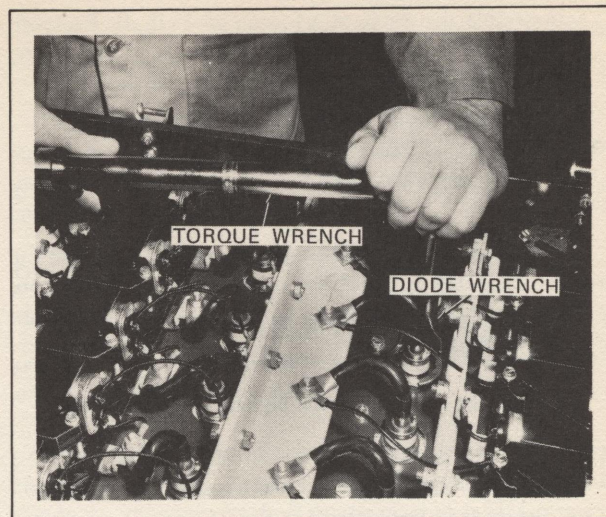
TORQUING DIODES ON TYPICAL PANEL.
